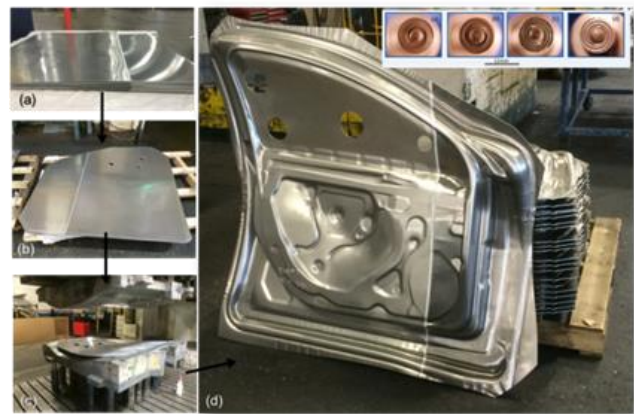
Production of a door using friction stir welding technique developed at PNNL: (a) welded blanks (b) welded blanks after cutting; (c) cut panels loaded for stamping; and (d) door panels after stamping.
